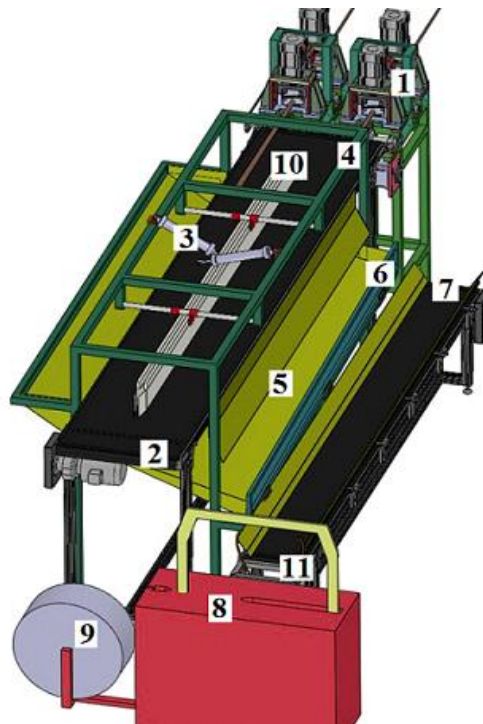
Sorting and Packaging Component: 1 - Measuring and cutting module; 2 - Conveyor and selector; 3 - Air cylinder; 4 - Selector skeleton; 5 - Inclined plane; 6 - Rods stopper; 7 - Buffer conveyor; 8 - Bundling machine; 9 - Band Supplier; 10 - Separator and ejector; 11 - Nippers
